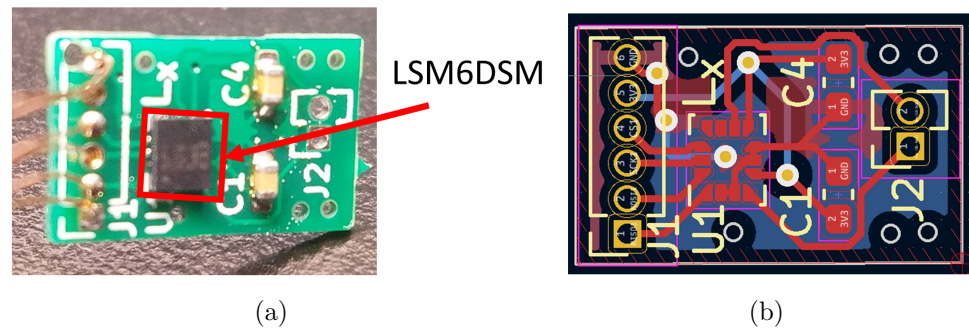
The IMU PCB based on the LSM6DSM package. (a) Shows the physical assembled PCB, and (b) Shows the KiCad schematic of the PCB. The dimensions of the physical PCB were 13.95 mm \times 8.53 mm.
